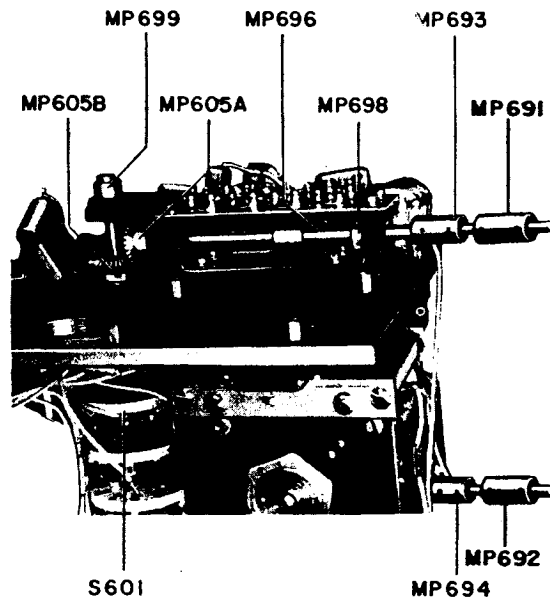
Electrical Frequency Control C-2861/WRT-1, Interpolation Oscillator Gear Train, Location of Parts in Oven
